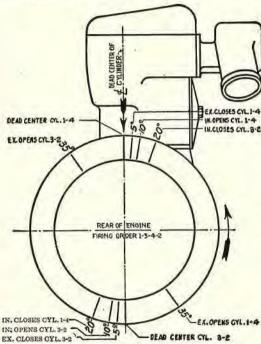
An example of valve-timing marks on the flywheel of a four-cylinder engine. See text for checking valve timing from these marks. View from rear of engine. Note that the flywheel turns to the left. This is the valve timing of the Continental "J4" four-cylinder truck engine with 3¾" bore and 5" stroke with firing order 1, 3, 4, 2. This engine actually bears only two marks on flywheel, namely "upper dead center" and "exhaust closes cyl. 1."
